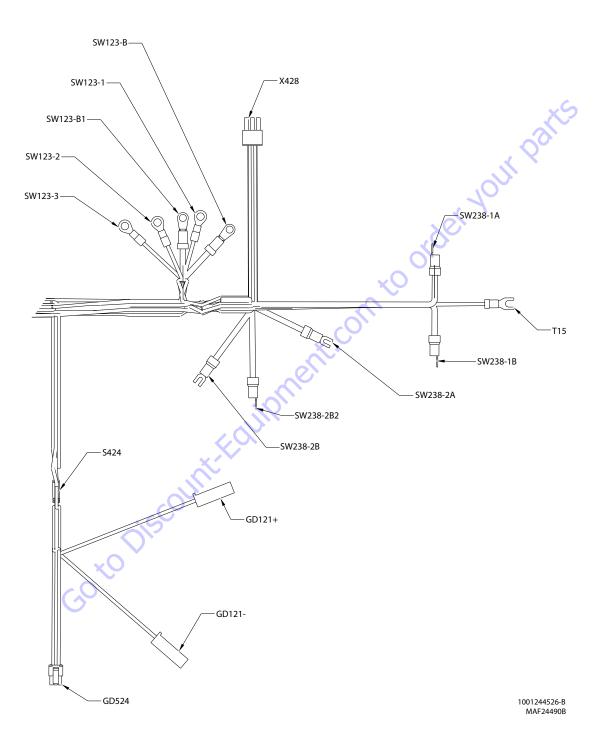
GND User Interface Harness - Sheet 2 of 7
